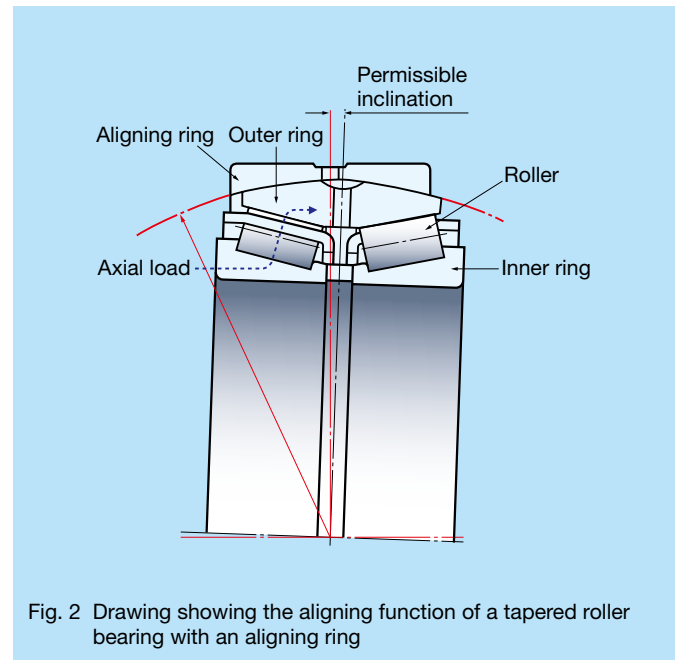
Drawing showing the aligning function of a tapered roller bearing with an aligning ring
